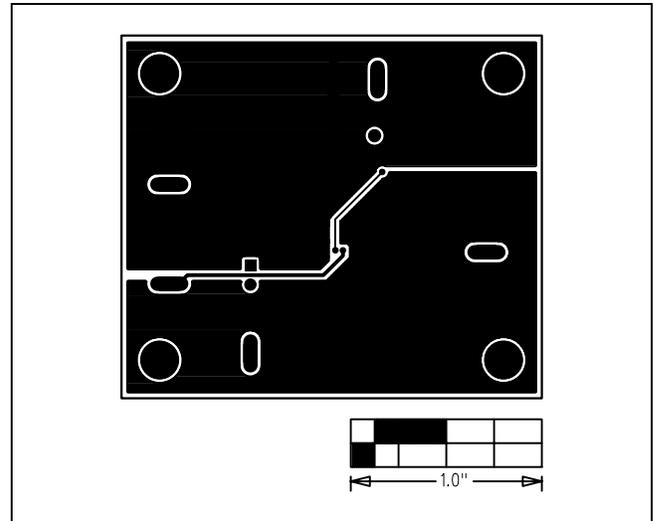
MAX17502F EV Kit PCB Layout—Solder Side
